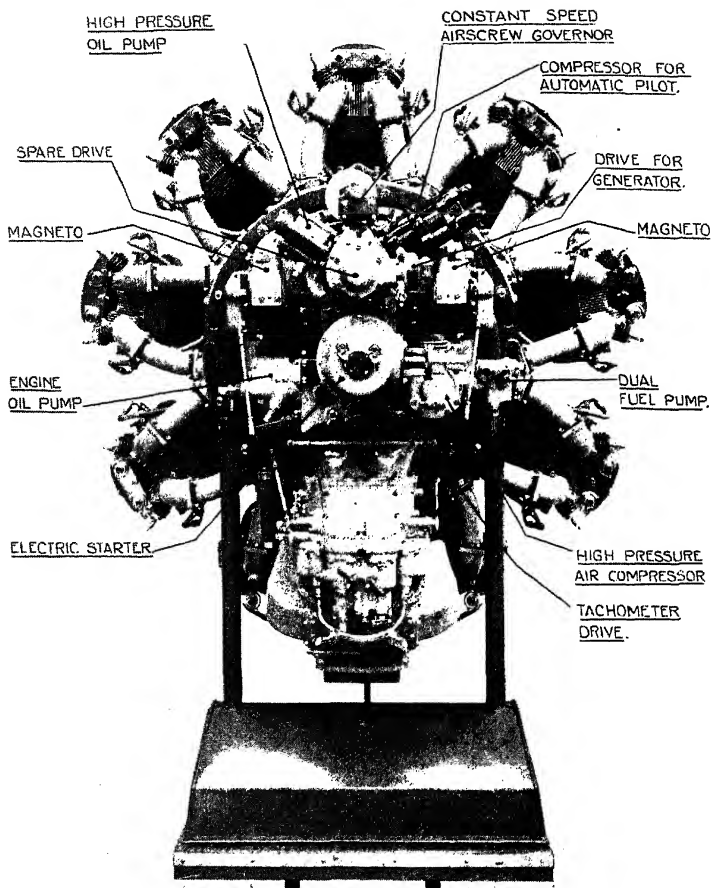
REAR VIEW OF "PEGASUS" ENGINE SHOWING ACCESSORIES.
